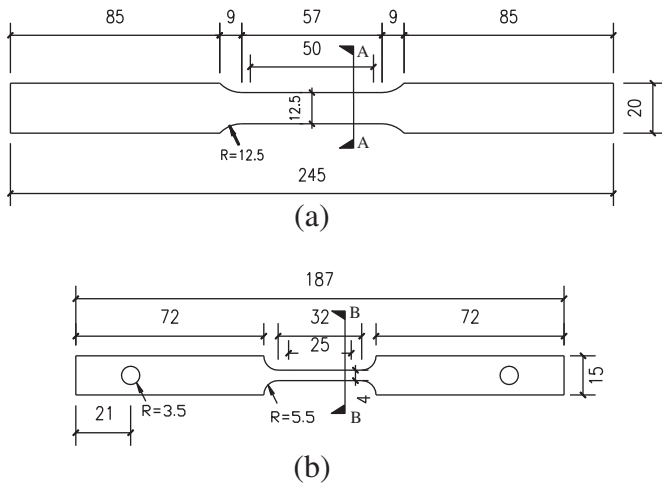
Dimension of coupon specimens. (a) Dimension of flat coupon. (b) Dimension of curved coupon.
